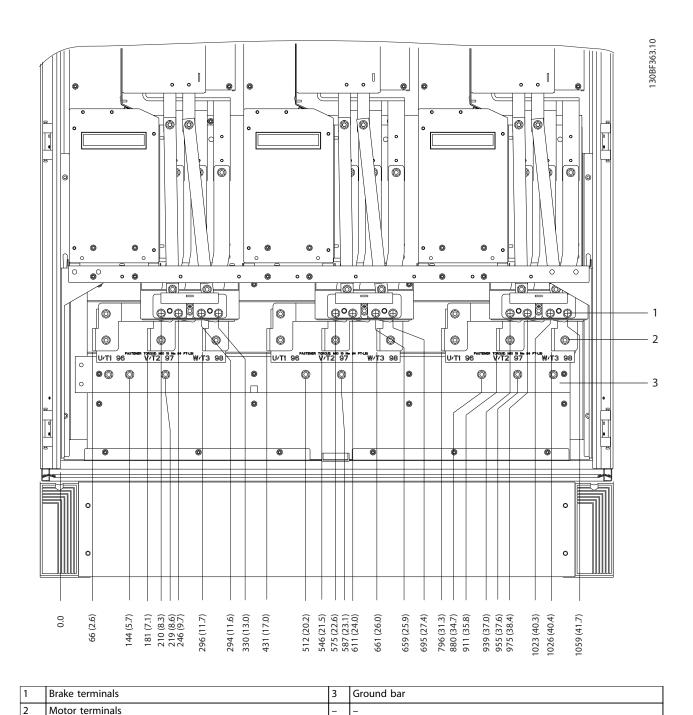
Terminal Dimensions for F12-F13 Inverter Cabinet, Front View
